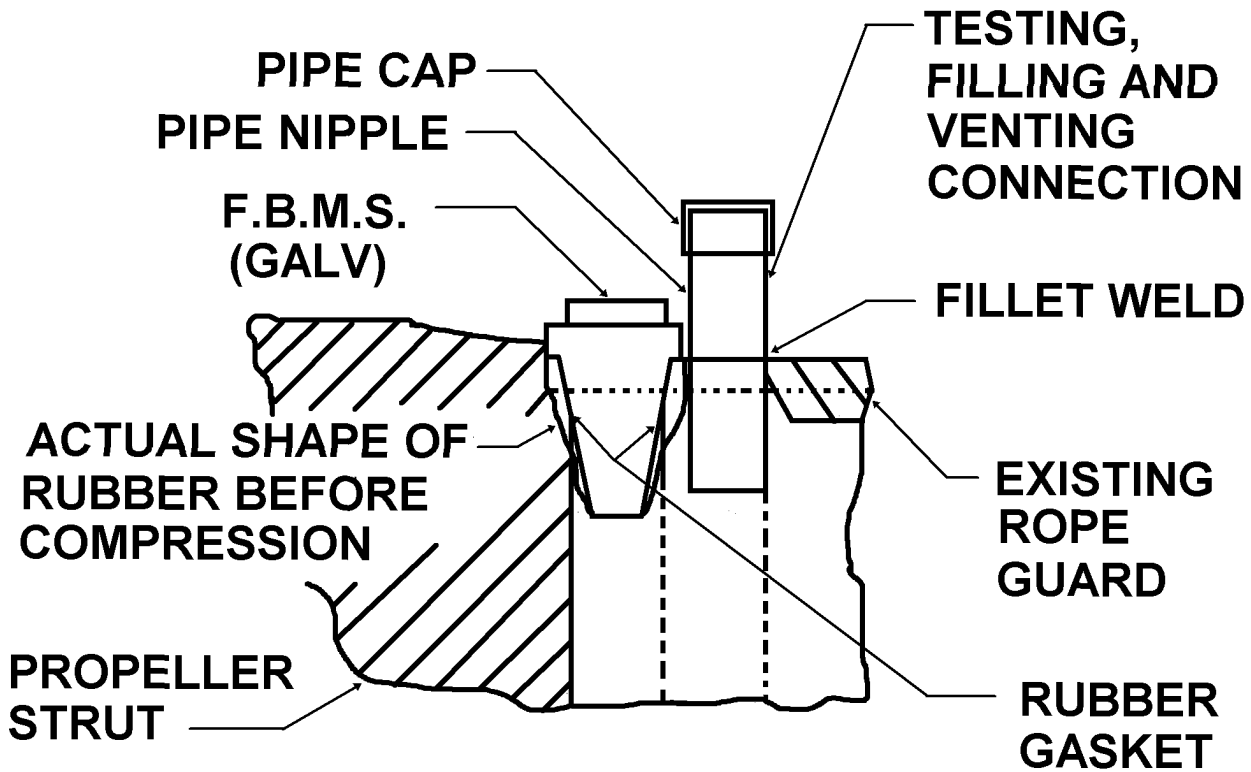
Band Clamp Compressed Tapered Rubber Gasket
